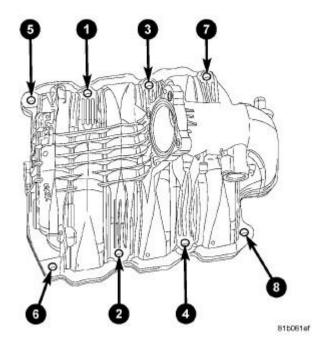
3.7L INTAKE TORQUE SEQUENCE Courtesy of CHRYSLER LLC
